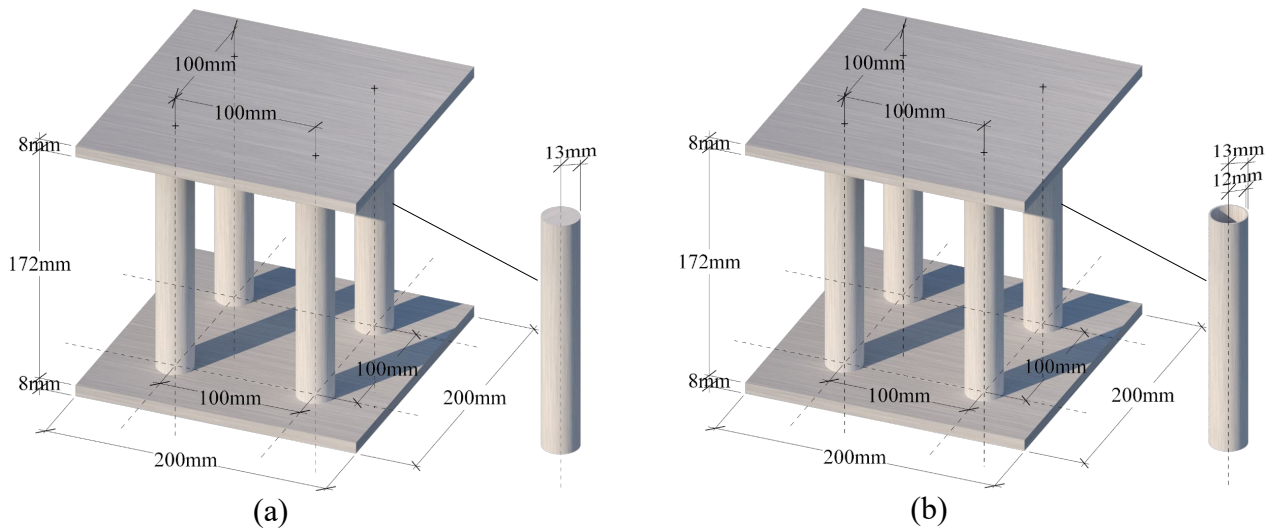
Schematic view of the sandwich panels with (a) Solid trusses and (b) Hollow trusses.
